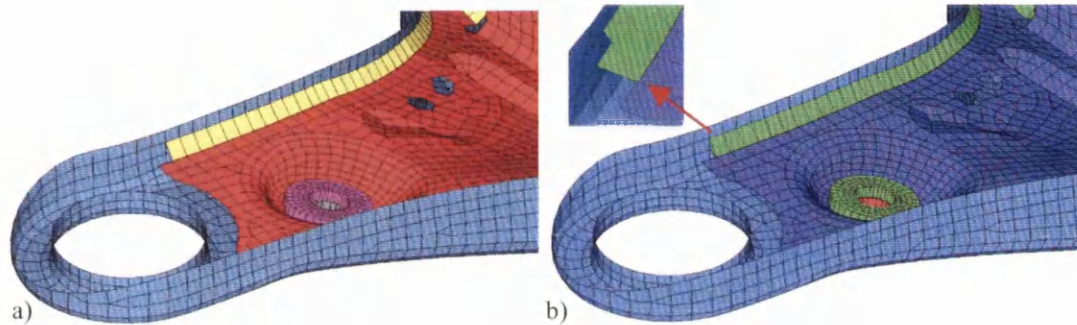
Weld line a) Cut-Length b) Cut-Length Tri (with the back panel)
